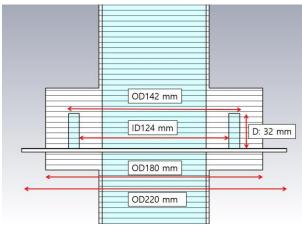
Dimension of designed DC break. Thickness of the inserted Teflon insulator is 3 mm.
